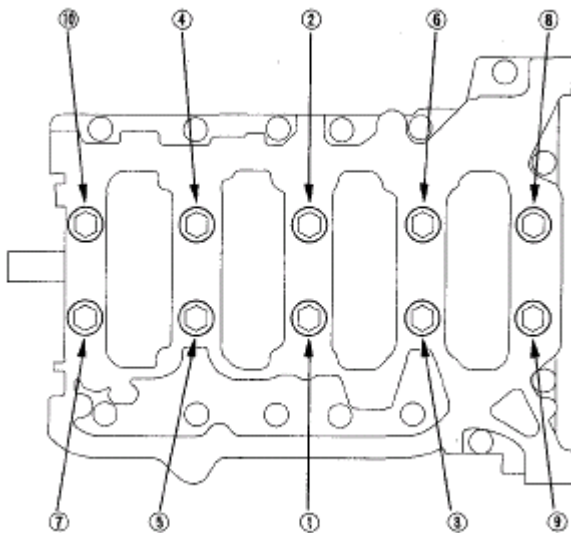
Identifying Bearing Cap Bolt Tightening Sequence
